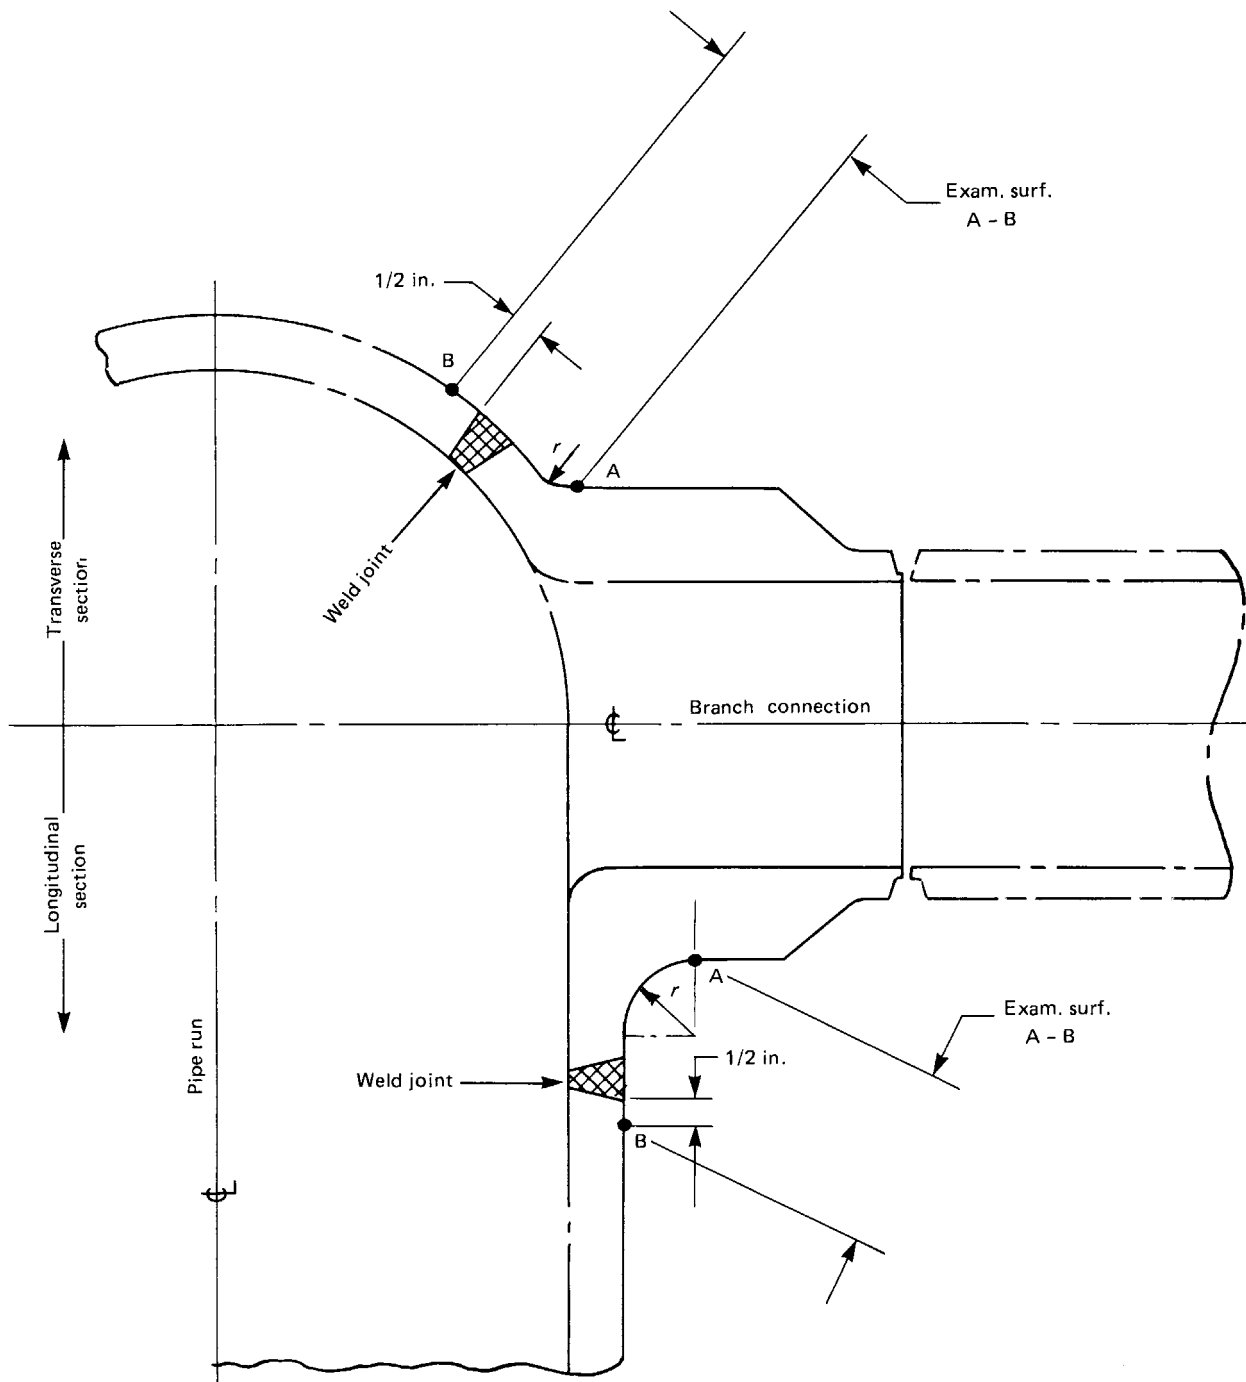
PIPE BRANCH CONNECTION
